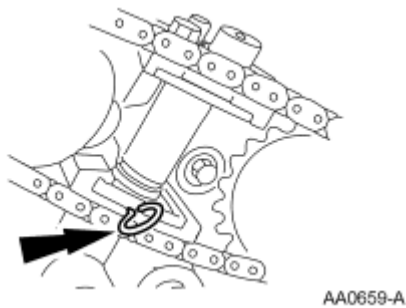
Identifying Secondary Timing Chain Tensioner & Lock pin
